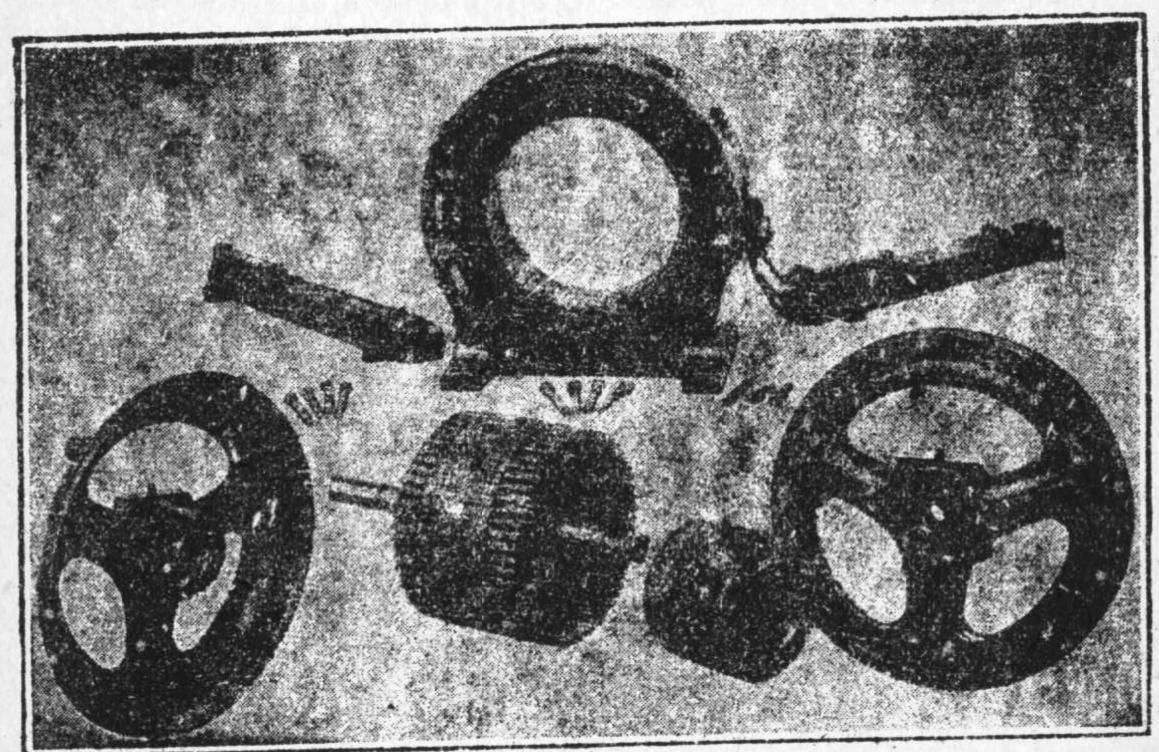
Alternating-current motor dismantled, showing parts. (Courtesy Allis Chalmers Co.)
